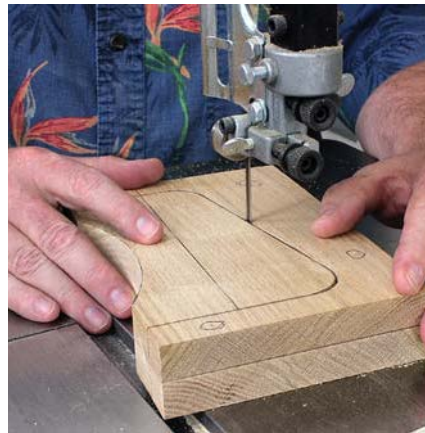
For identical workpieces, cut out both sides at the same time whenever possible.
